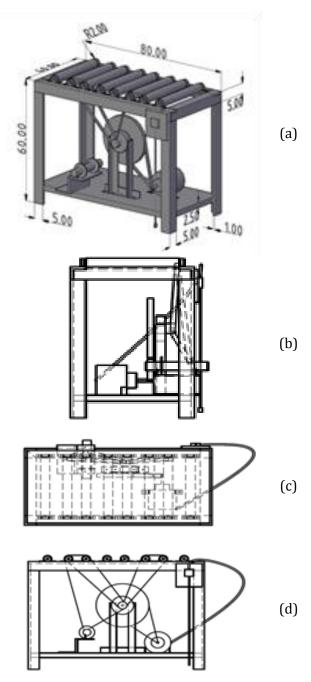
Detail design (a) dimension; (b) side view; (c) top view; (d) front view.
